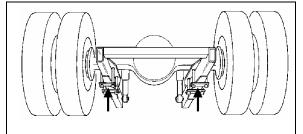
JACKING POINTS ON DRIVE AXLE 11005
